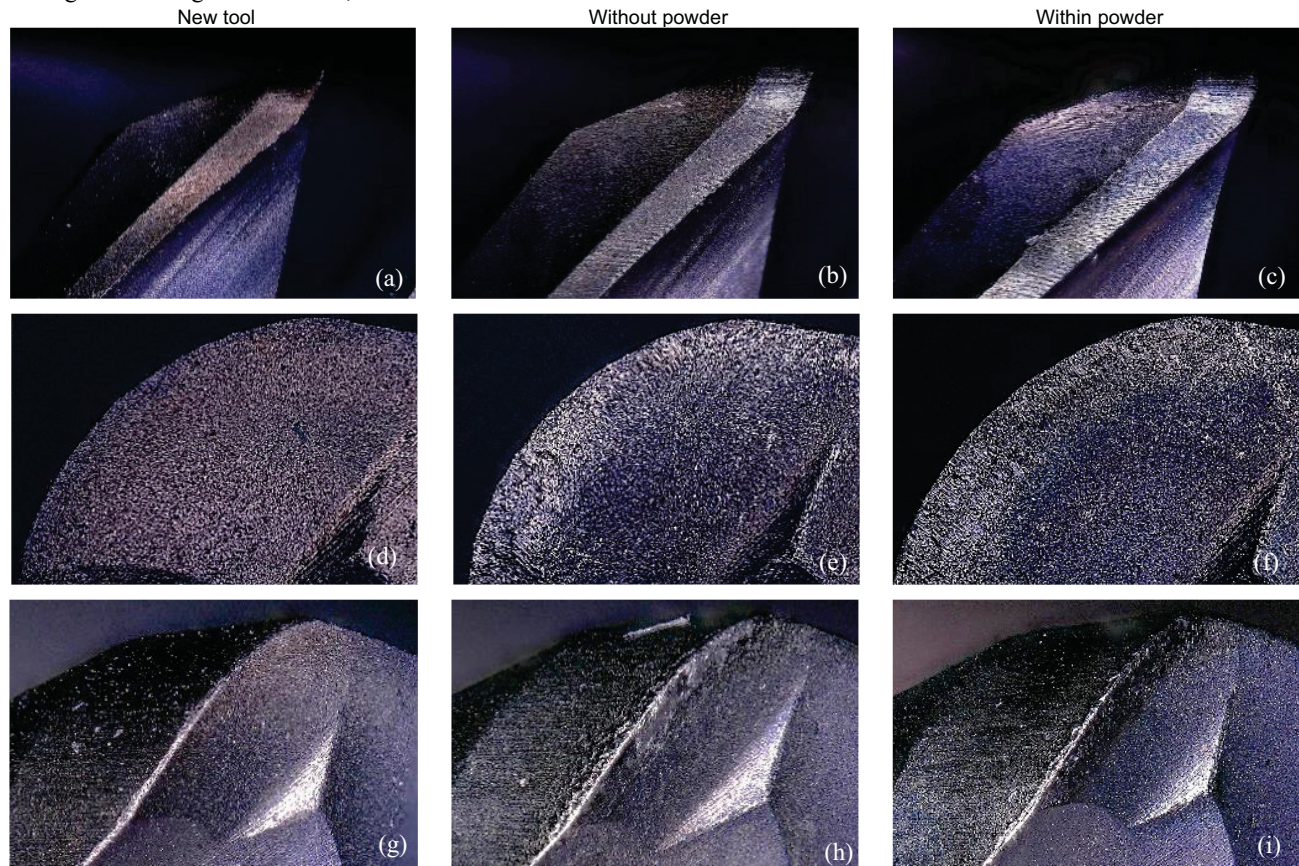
Tool wear analysis of the flank and rake faces: (a,d,g) new cutting tool; (b,e,h) cutting without powder; (c,f,i) cutting within powder.
